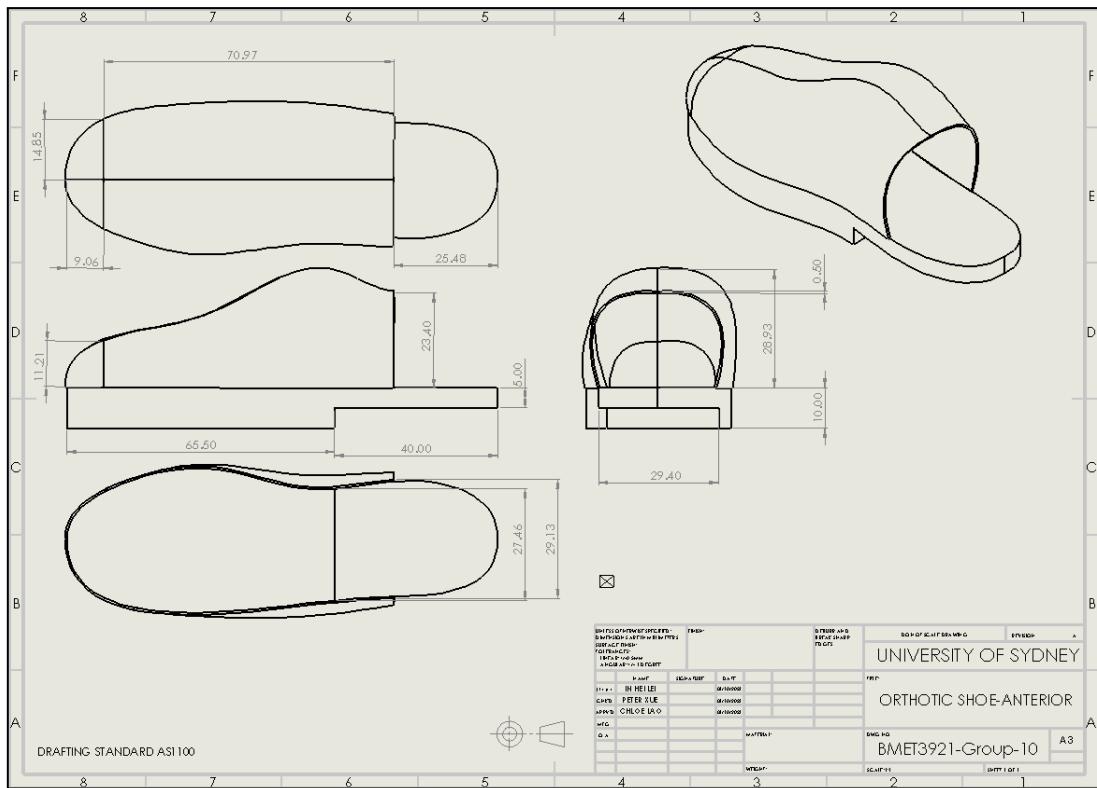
CAD Projection of the Anterior Shoe Component (Component 1)
